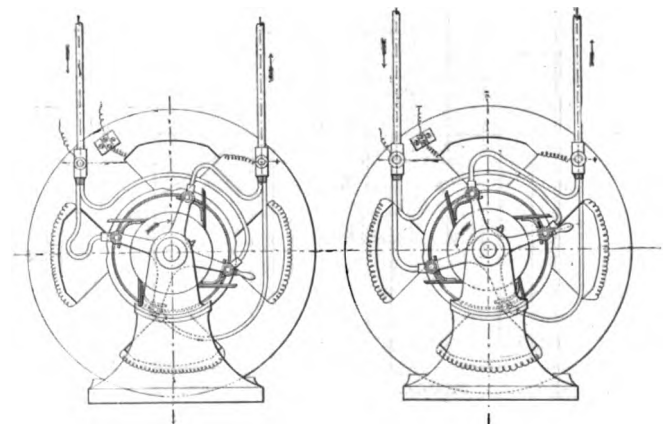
ARRANGEMENT FOR REVERSING MOTOR.
